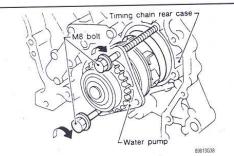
The water pump is drawn out of the timing chain case using two long bolts
